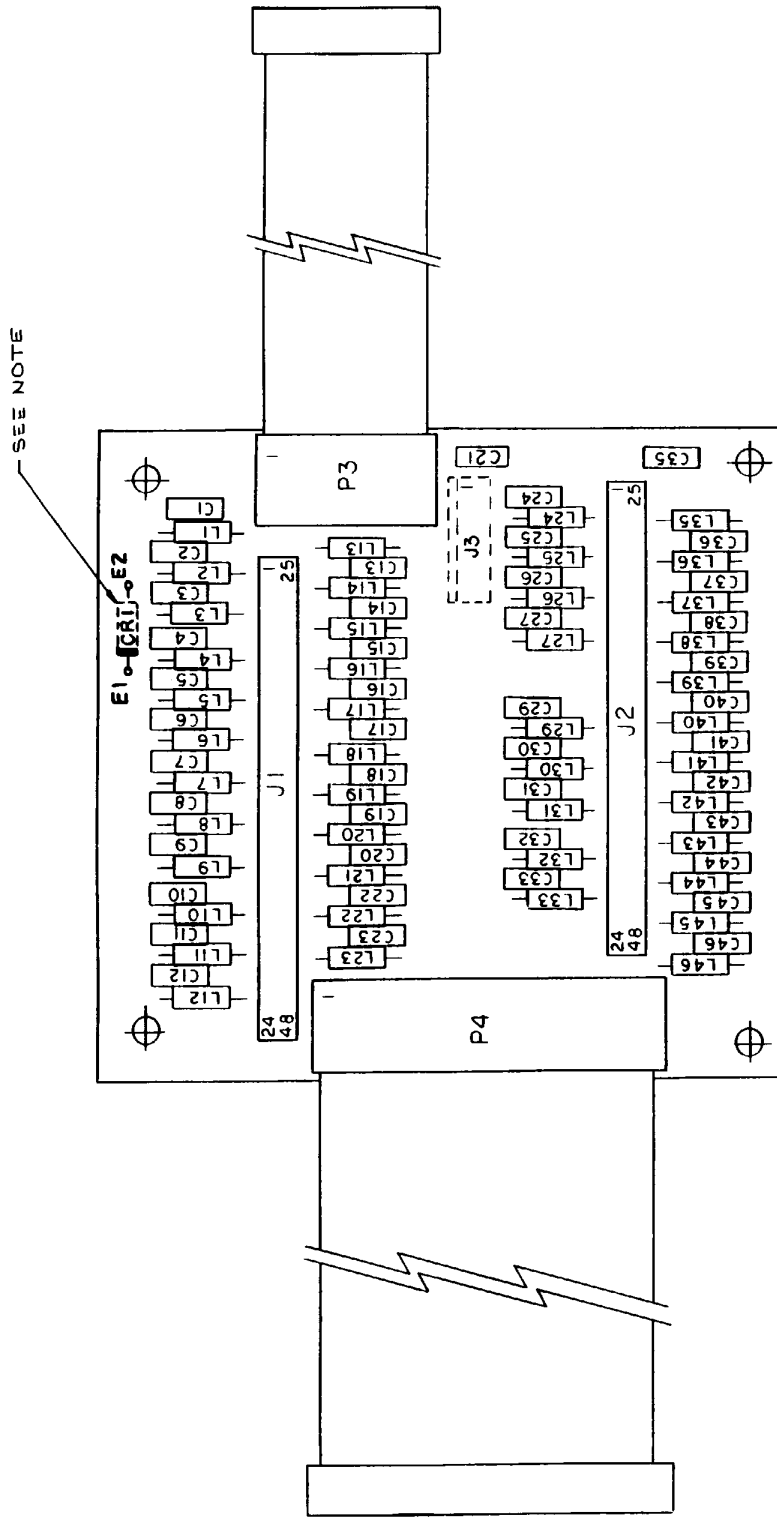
Filter Board Assembly A20A1 Component Location Diagram (10121-1260 Rev. C)
